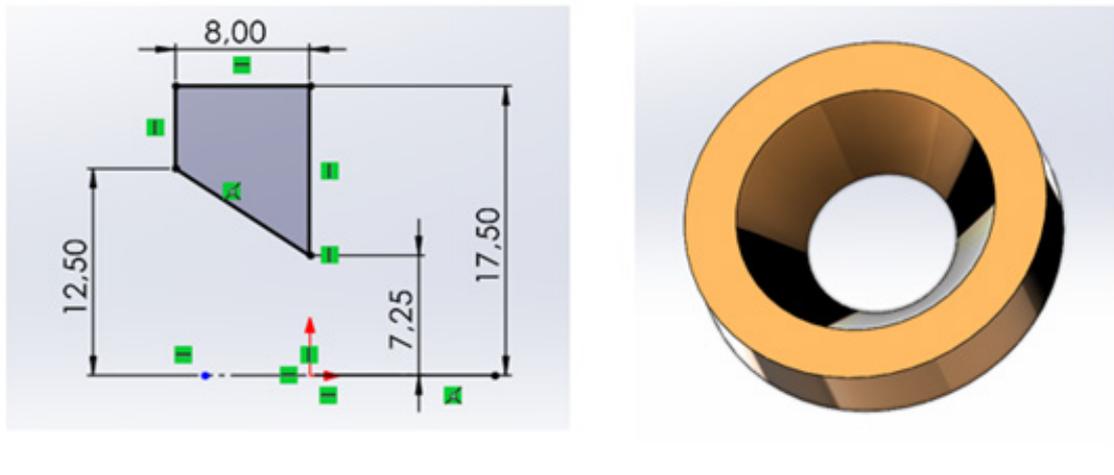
Washer (Part-5) design: (a) Dimensional 2D view, (b) 3D CAD model.
